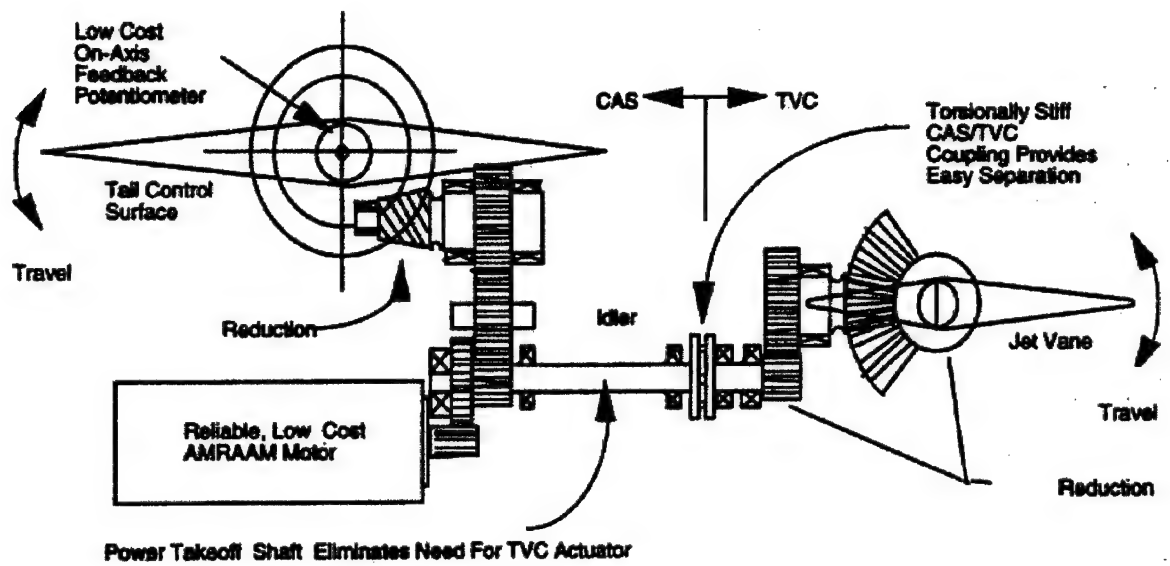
Cardan PTO Coupling Mechanism and SCS/JVC Geartrain
